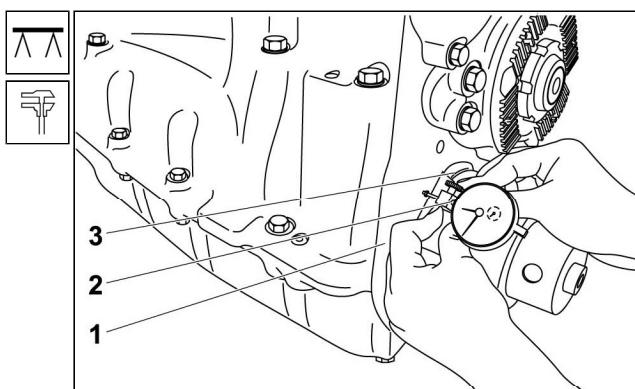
Adjustment of the countershaft bearings axial clearance - 1
